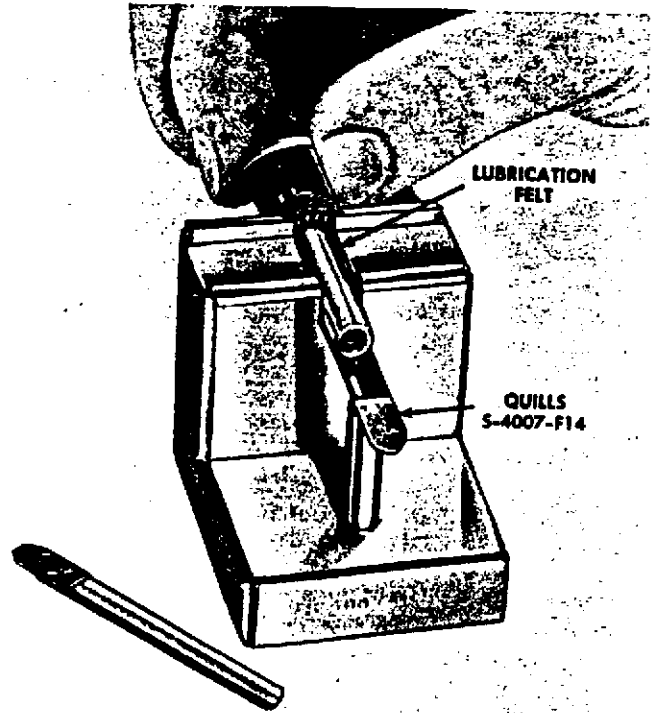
, Reassembly of Counter Gear and Shuttle Shafts
